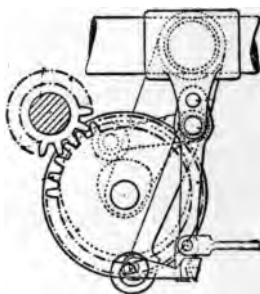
Bollée Governing Arrangement for Internal Combustion Engines (Side View).
